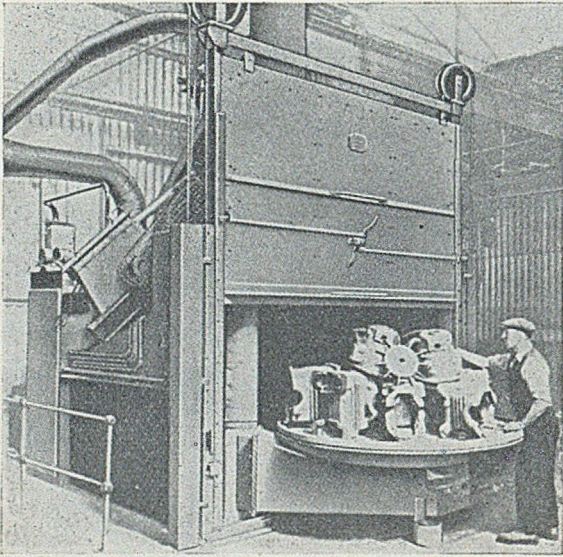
Shot-blasting Equipment of the Airless Swing-table Type.
